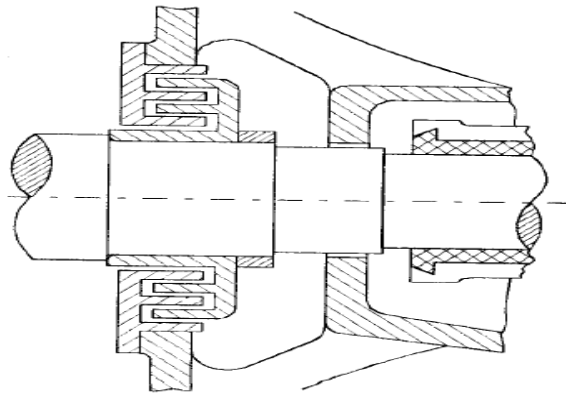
Labyrinth joint for shaft of rotating electrical machine
